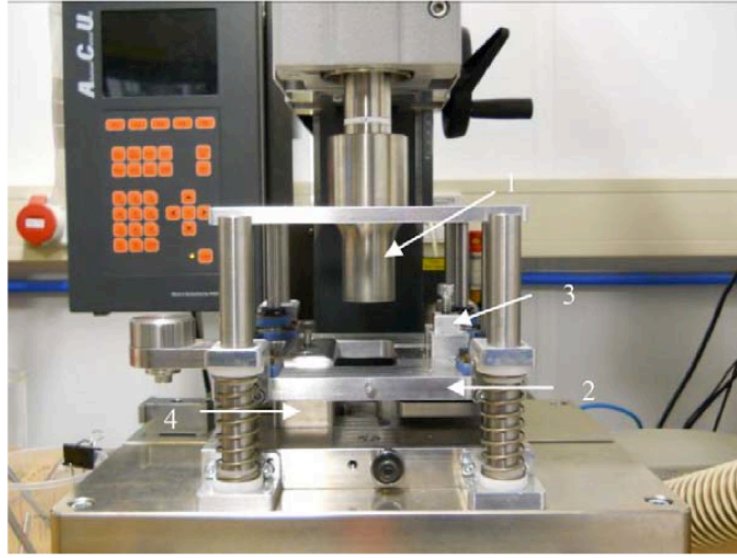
Ultrasonic welding device. 1: sonotrode, 2: sliding platform, 3: clamp for upper sample, 4: clamp for lower sample (Fernandez Villegas, 2013).
